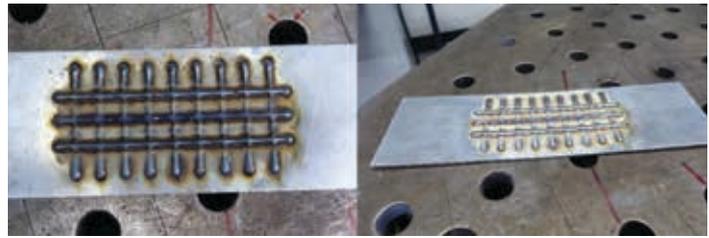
Welding results after additive manufacturing a grid on zinc coated steel sheets of 2.0 mm thickness.
